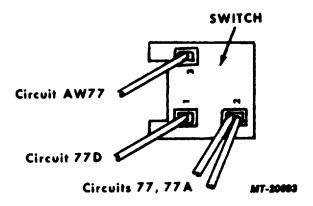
Thermostatic Control Switch Wiring Connector Locations
